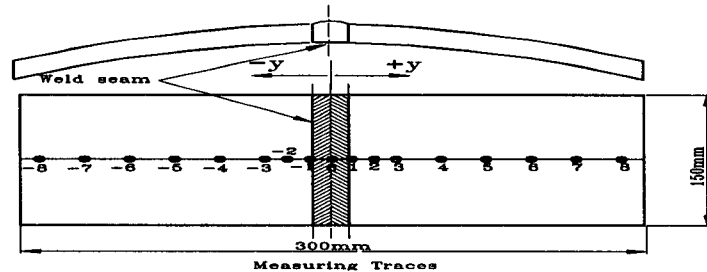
Sketch of welded plate together with positions of the measuring traces residual stress measurement experimental apparatus
